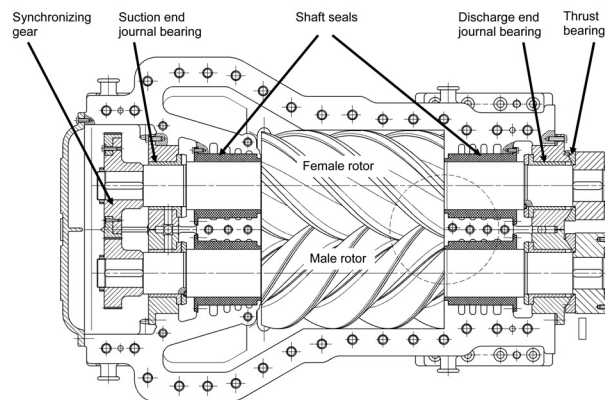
Horizontal Section of Dry Screw Compressor with Main Components.
